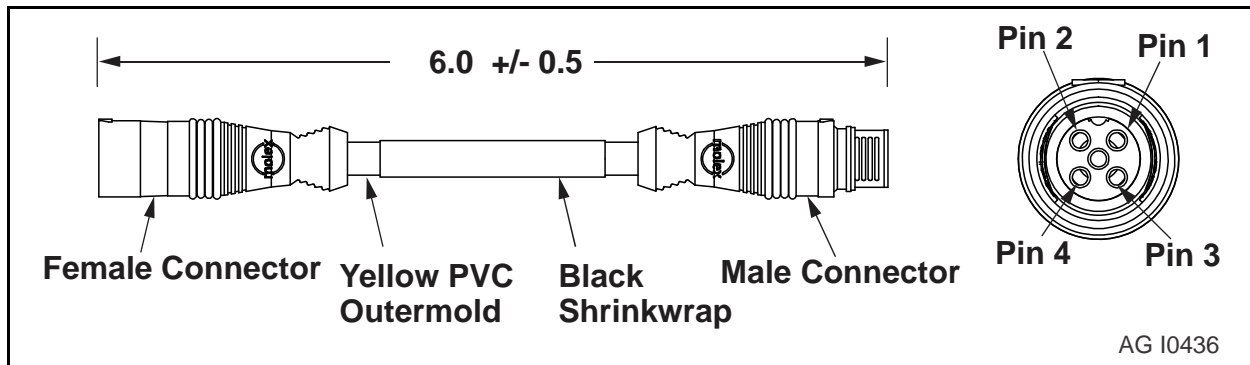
13 Slug Terminator Cord 0-6 Black
